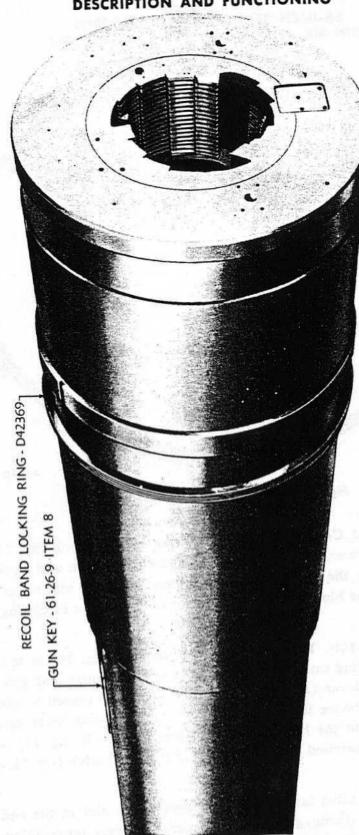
16-inch Seacoast Gun-barrel—Rear View
